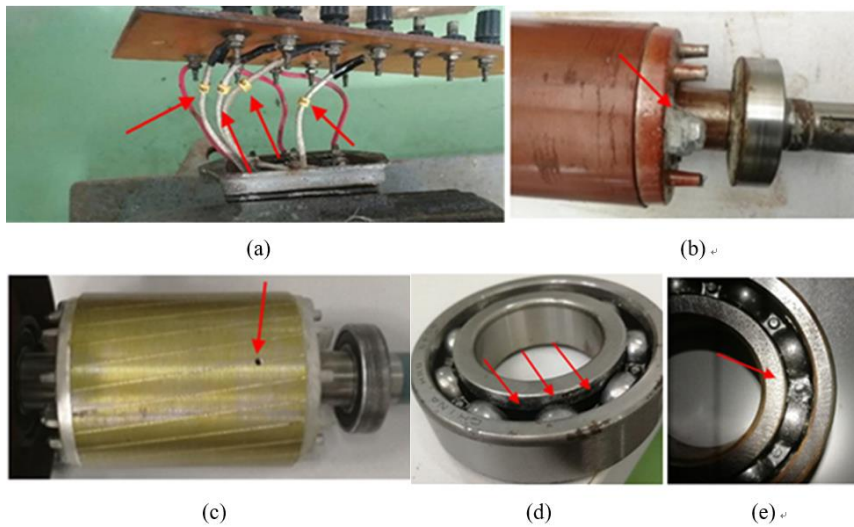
Common forms of fault in asynchronous motors. (a) Short circuit; (b) air-gap eccentricity; (c) Rotor bar broken; (d) Bearing abrasion fault; (e) Bearing cage broken.
